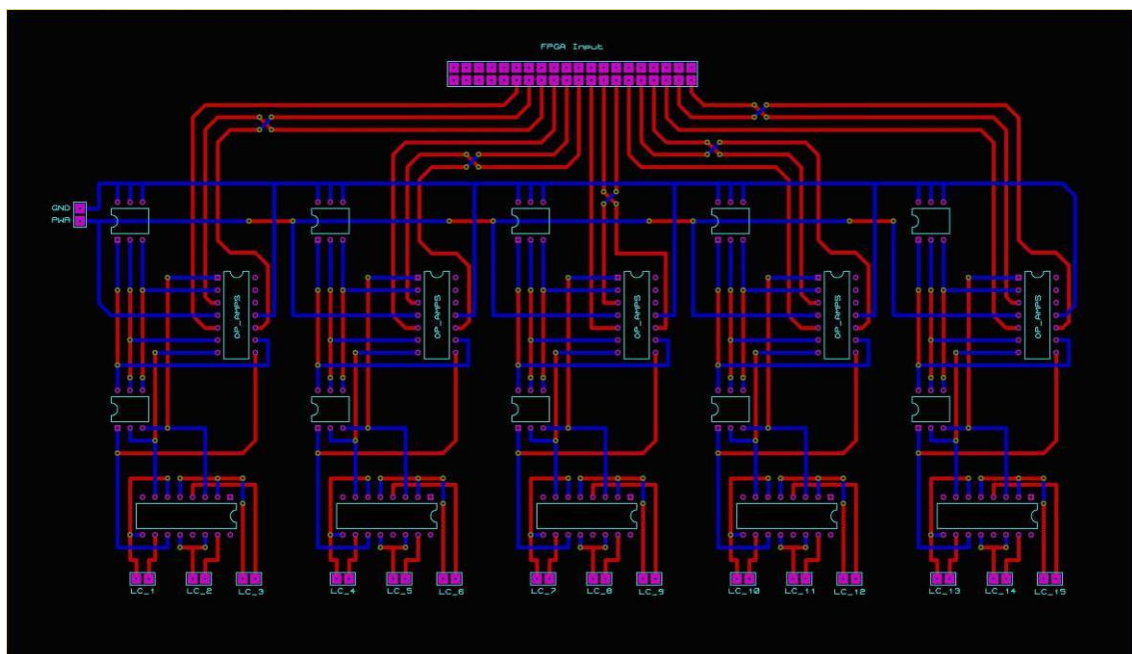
PCB module layout for driving 15 LCs. The blue is the upper layer and red is the lower.
